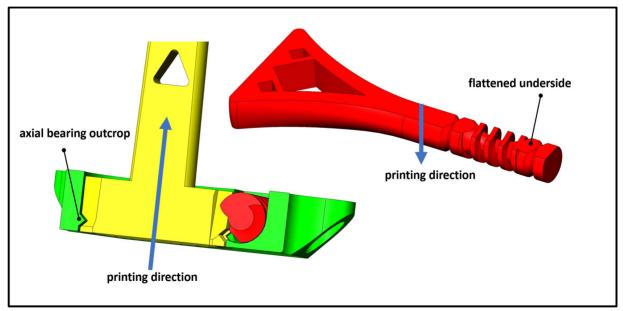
Details of Worm Wheel Assembly and Worm Shaft
